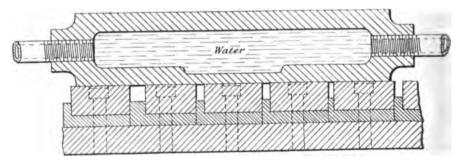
Wicks rotary typecaster; angle-base moulds. Scale: full size. Sections of Wicks moulds and top cover showing arrangement for water-circulation and the different methods of mould construction adopted.
